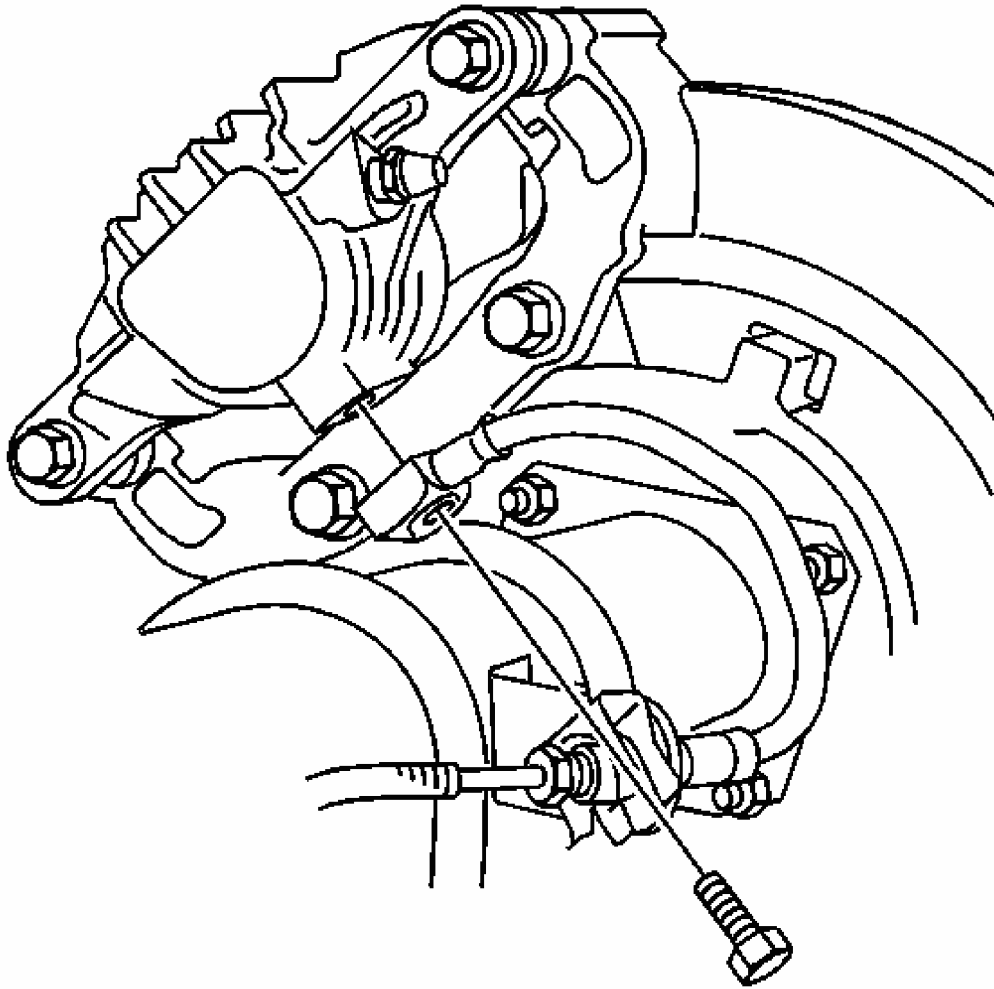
Locating Brake Hose To Brake Caliper Bolt
